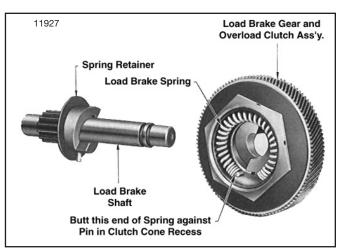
Load Brake Gear and Overload Clutch Assembly Removed from Load Brake Shaft Showing Brake Spring Installed in Clutch Cone
